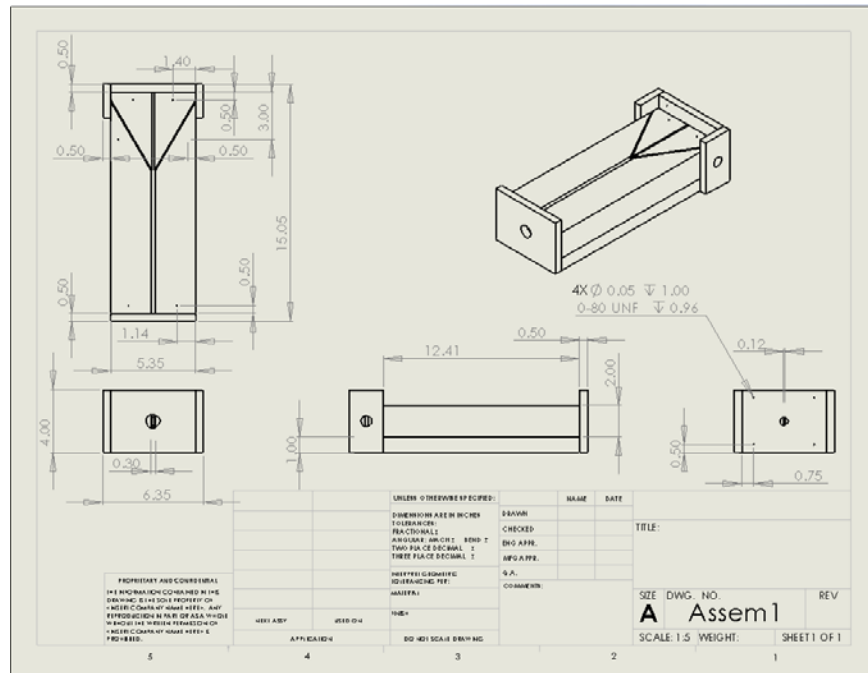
Technical drawing of the filtration block generated using Solidworks that shows key assembly dimensions.
